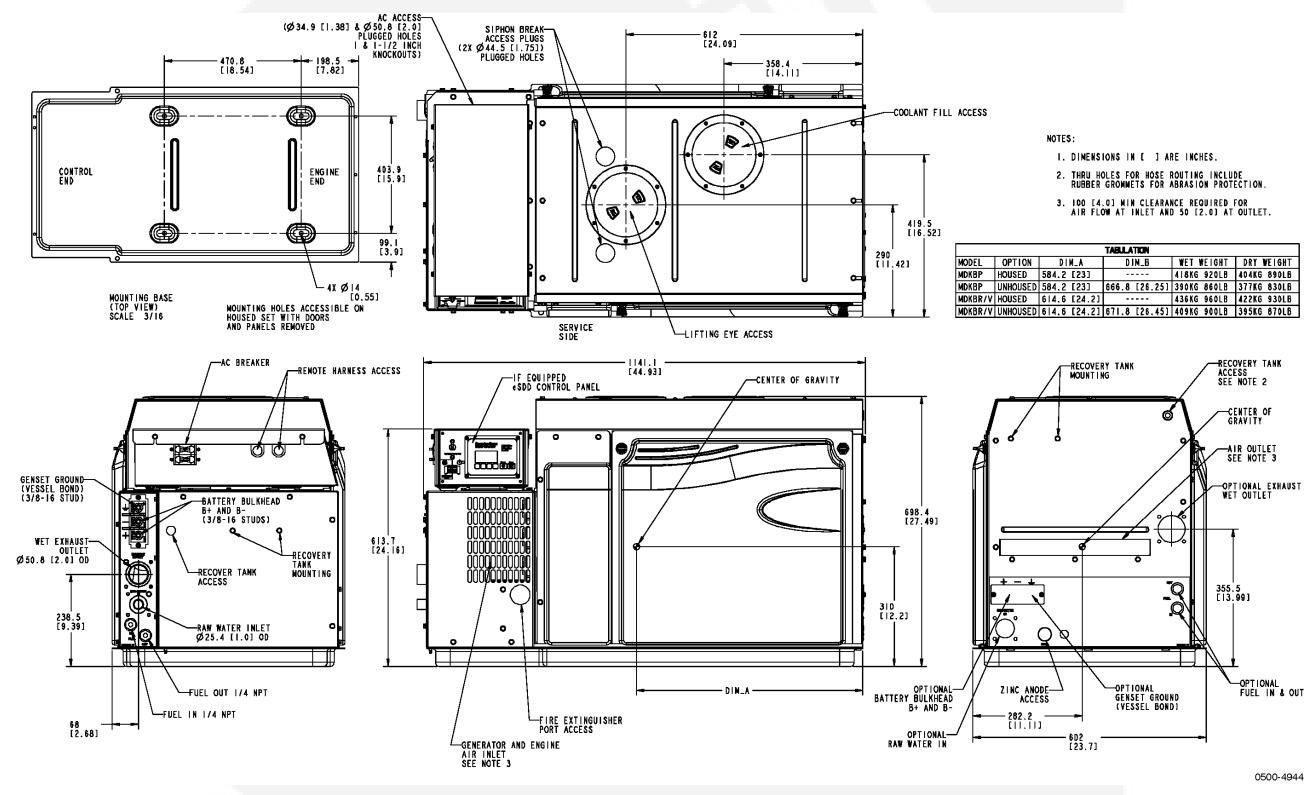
MDKBP, MDKBR, AND MDKBV OUTLINE DRAWING (SHEET 1)
